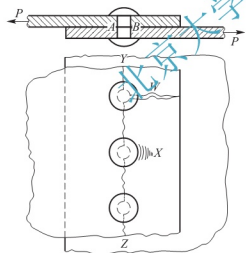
Modes of failure of a simple riveted lap joint
